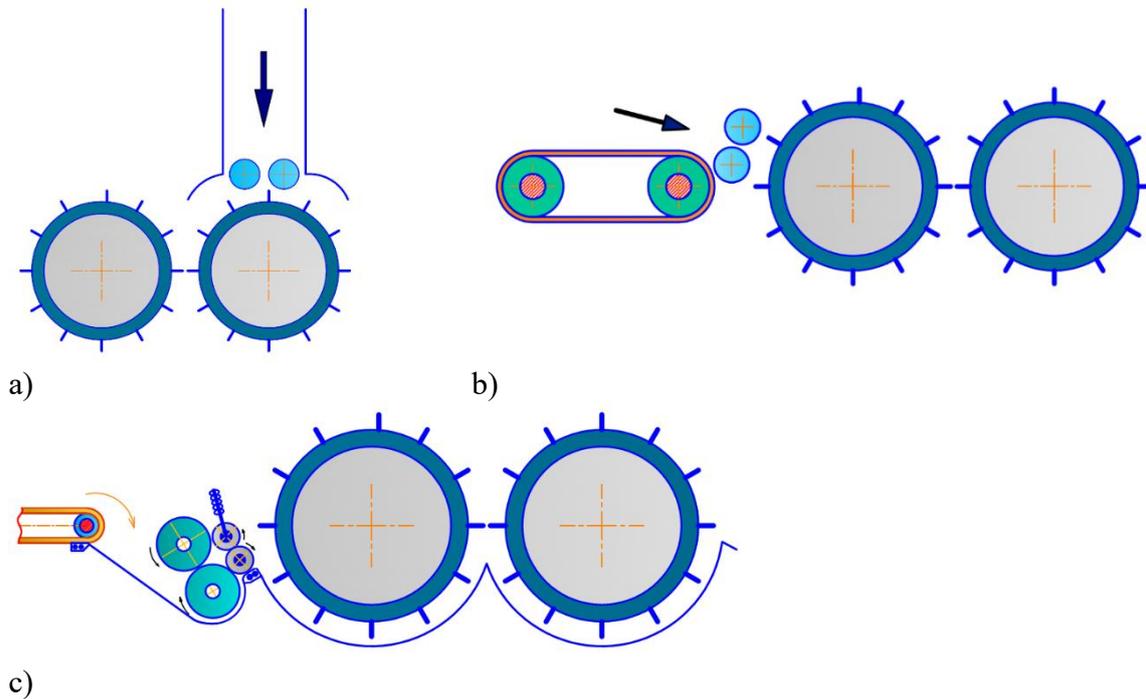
Installation methods of the feeding mechanism in the carding and cleaning machine: a - vertical feeding mechanism; b - horizontal feeding mechanism; c - inclined feeding mechanism.
